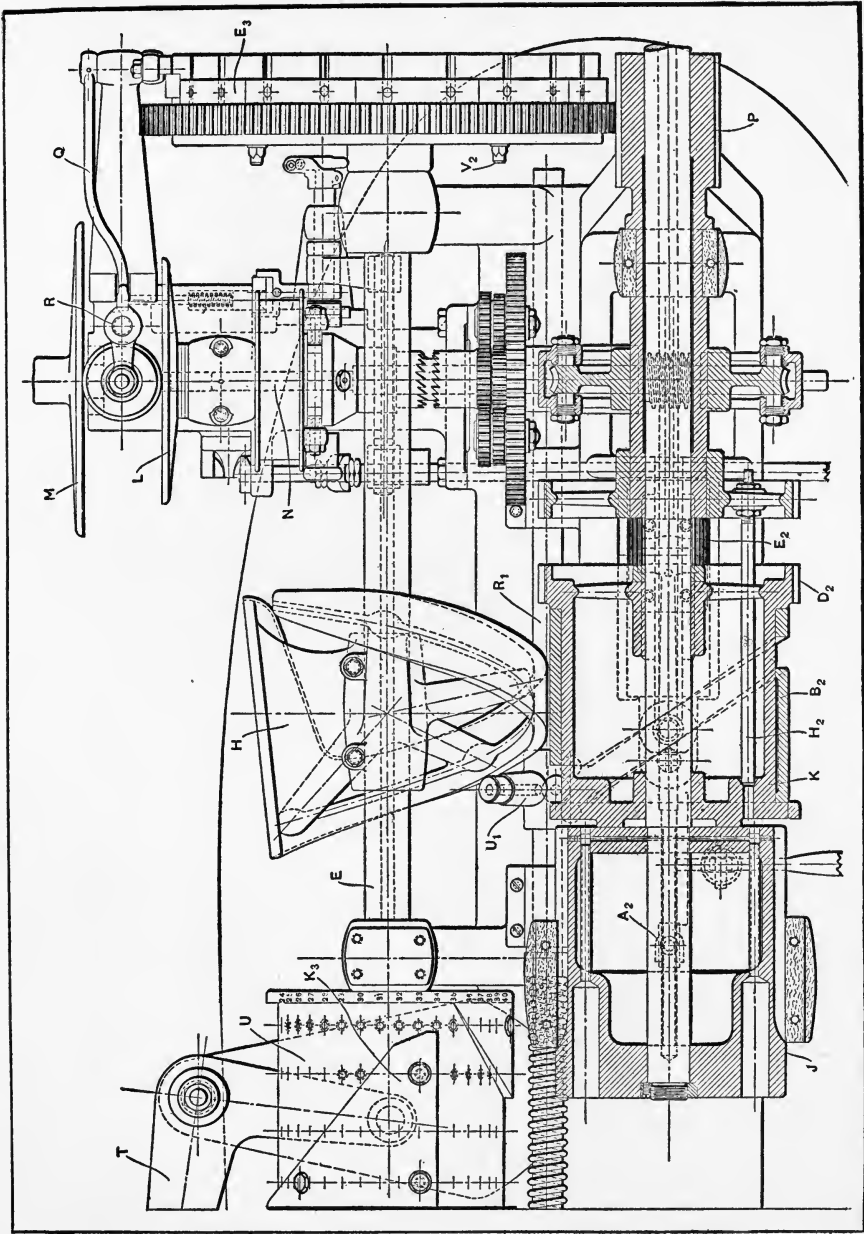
Sectional Plan View showing Mechanism for Operating Turret and Cross-side of Cleveland Automatic
